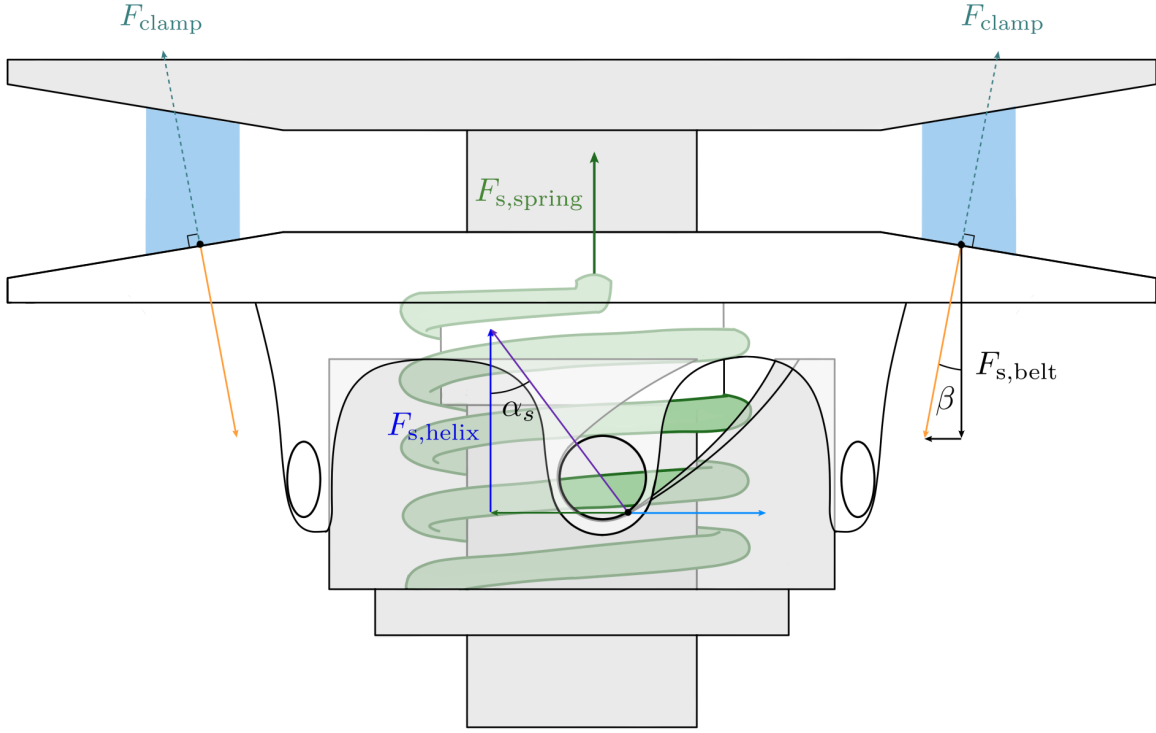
Axial free body of the complete movable secondary assembly. The axial spring force and belt reaction act directly on the translating assembly, while the secondary's torque-reactive behaviour enters through the pin-helix force $F_{s,\text{helix}}$.
